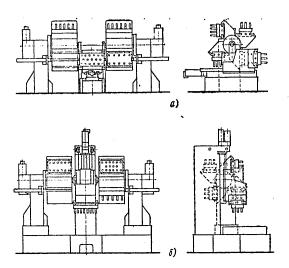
Two-sided PAS design developed by the Moscow Special Design Bureau of Automatic Production Lines and Modular Machine Tools: 1 - Power table; 2 - Turning device; 3 - Part being processed; 4 - Turning table; 5 - Multi-spindle box; 6 - Terminal release.
